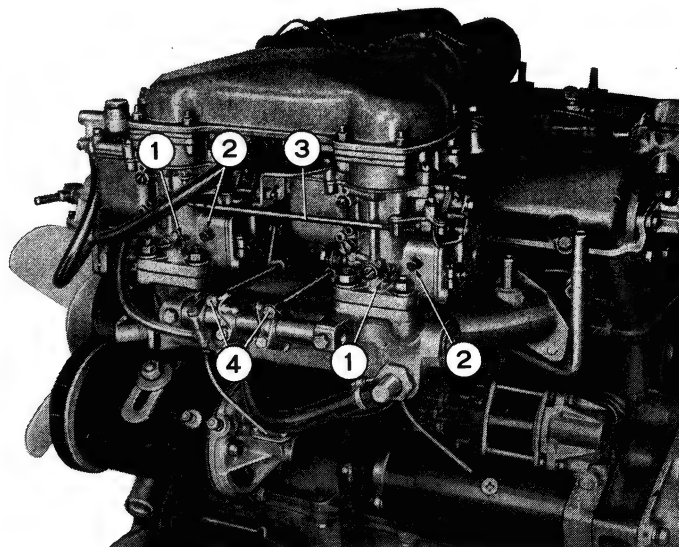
Weber 34 DCS 2 and 34 DCS 4 carburetors in place on engine 118 B.000.
